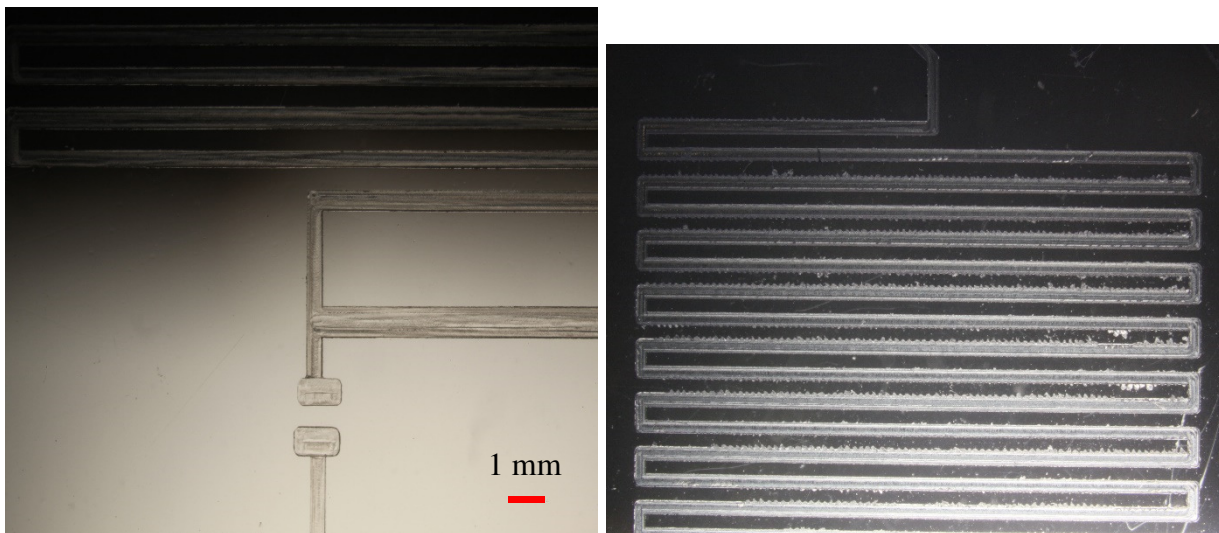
Milled valve chambers (left) and resistor network with burrs at edges of channels (right).
